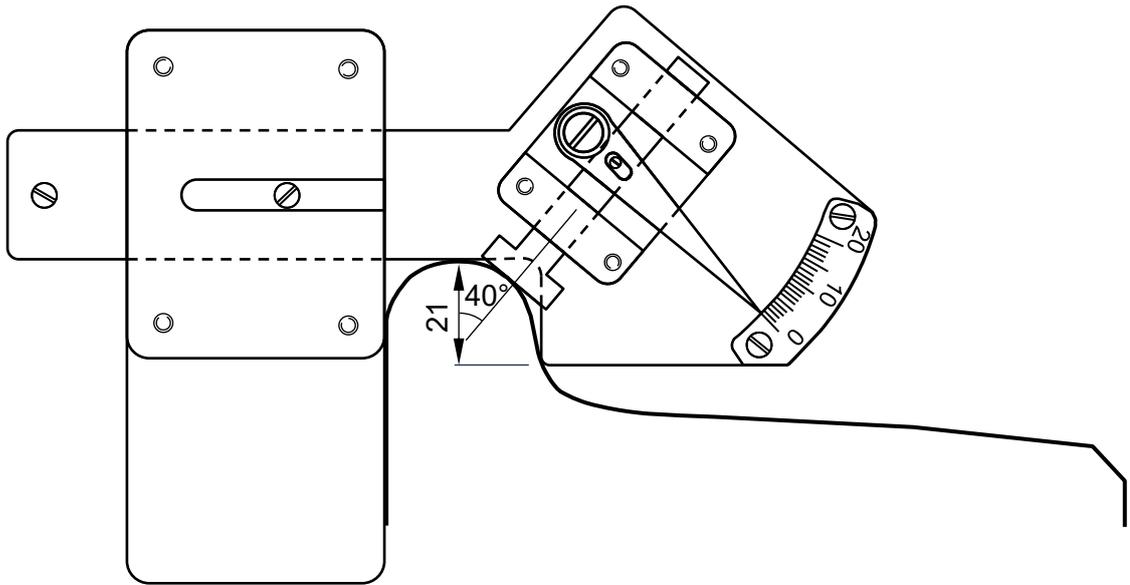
Tread Hollow Gauge – Legacy Dimension ‘V’ (mm)
